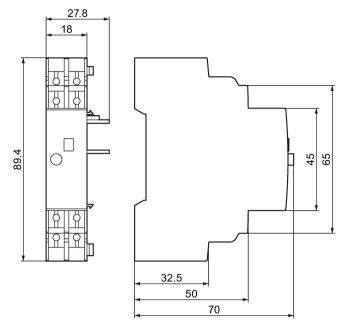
3RV2921-4M signaling switch (ring cable lug connection)
